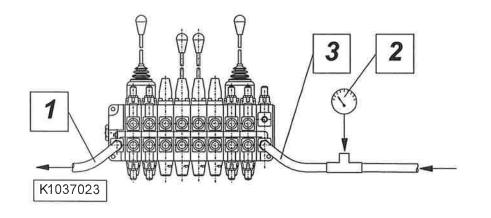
and 2. Measuring quick coupling EMA 3 DIN 2359
